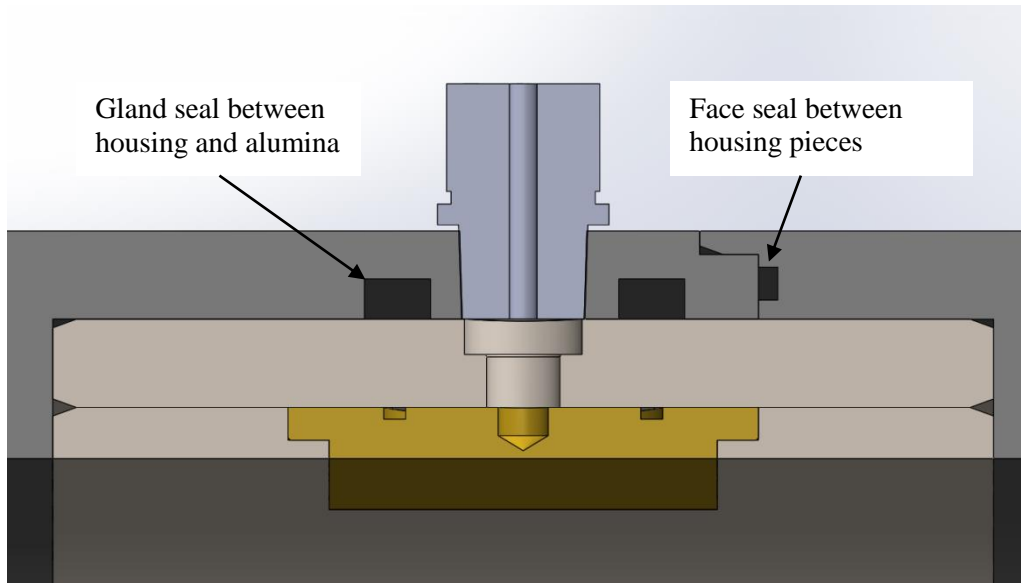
Radial cross-sectional view of MPFM to show housing o-ring details
